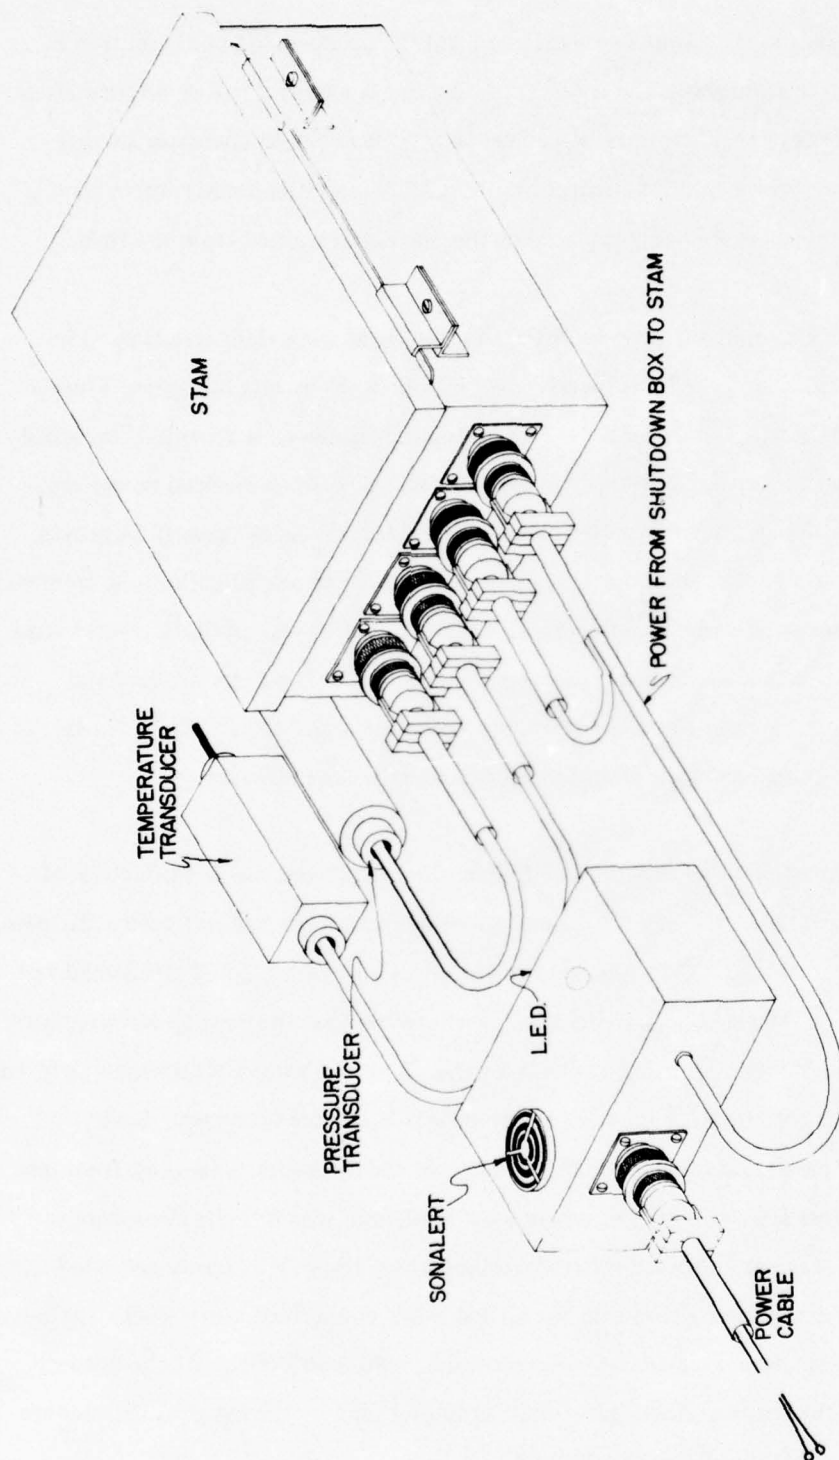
STAM Assembly with End-of-Test Annunciator.
